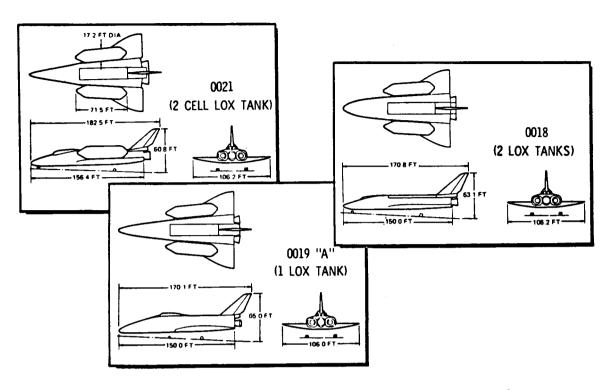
Orbiter and External Tankage Assembly, Three Engine Orbiter, 3012 Cylindrical LH2 Tanks
